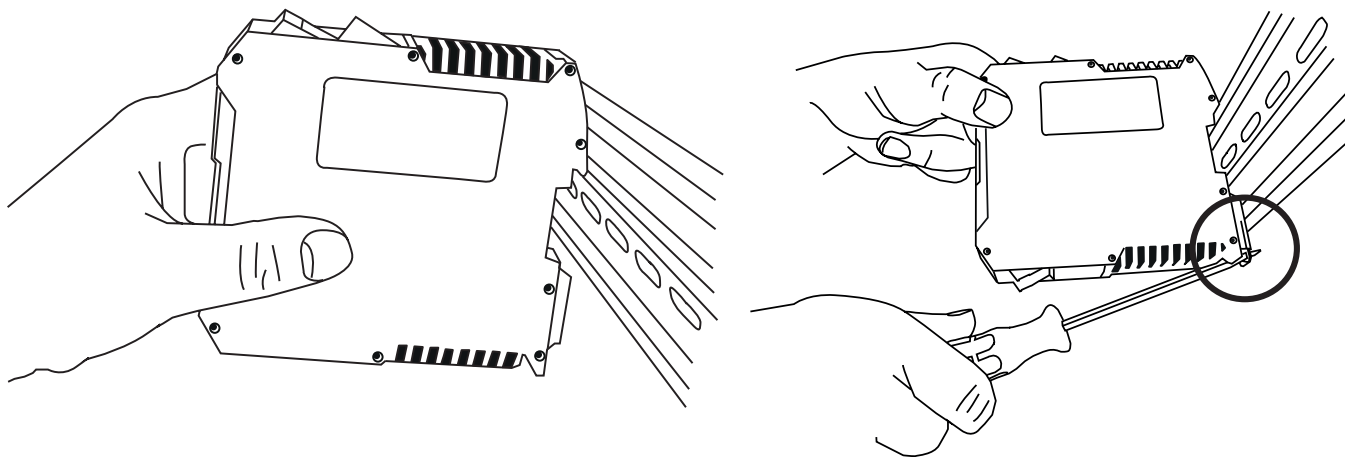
Mounting the VT-MSPA...-2X on a DIN mounting rail
